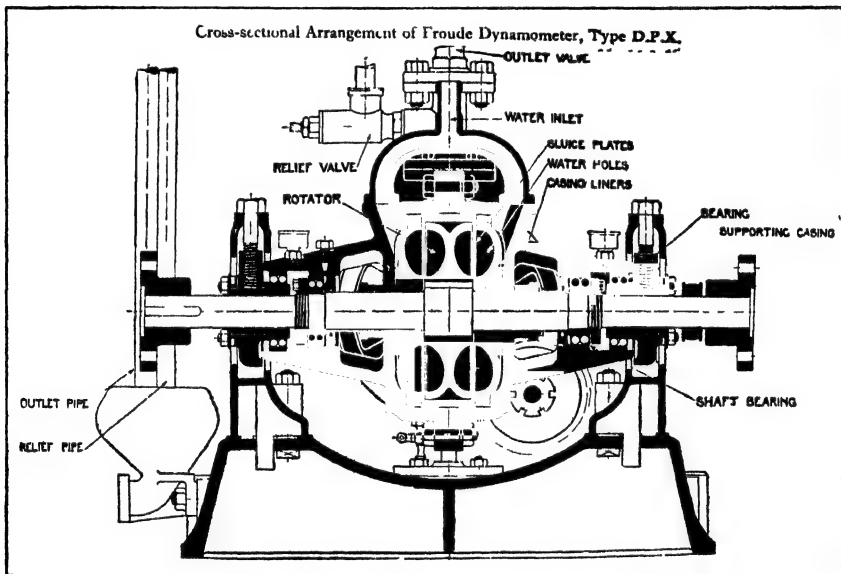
F.—Sectional View Showing Internal Construction of "Froude" Type D.P.X. Dynamometer. Note Simplicity of Rotating Element and Shape of Water Pockets.
